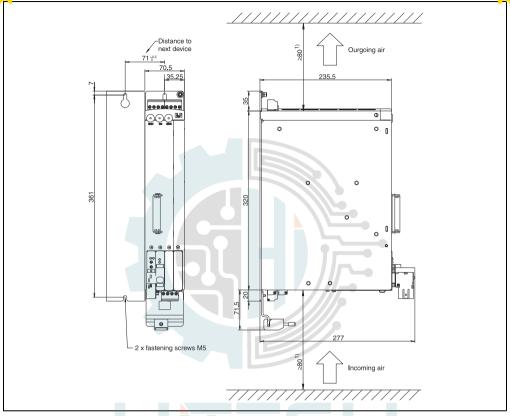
Dimensional diagram and installation dimensions for ACOPOS 1022, 1045, 1090
